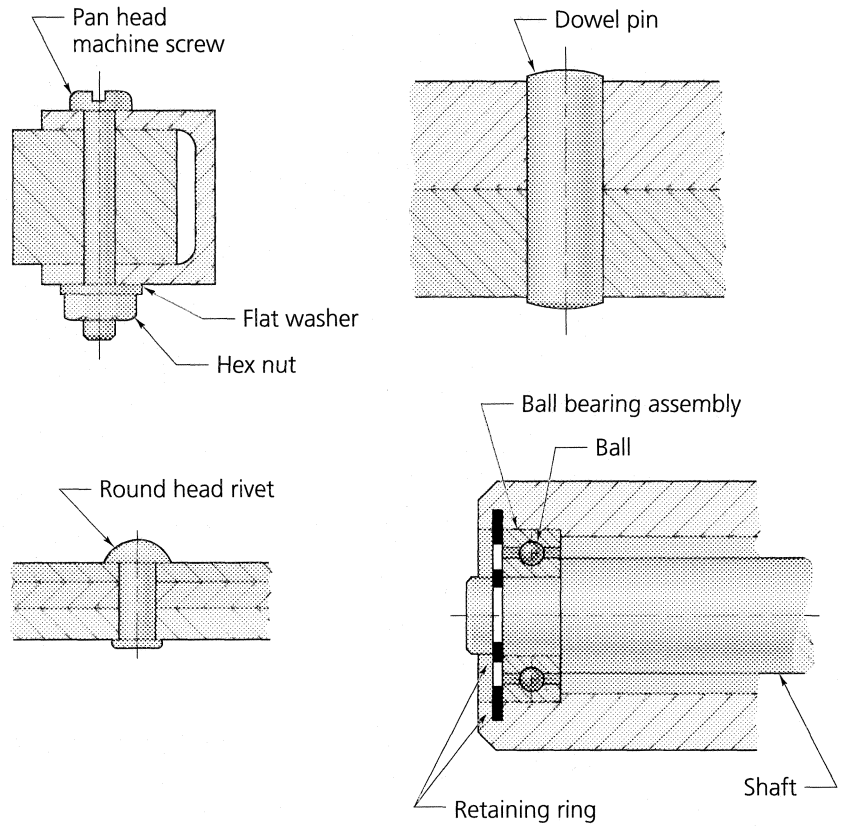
Assembly and Solid Threaded Part in Section
